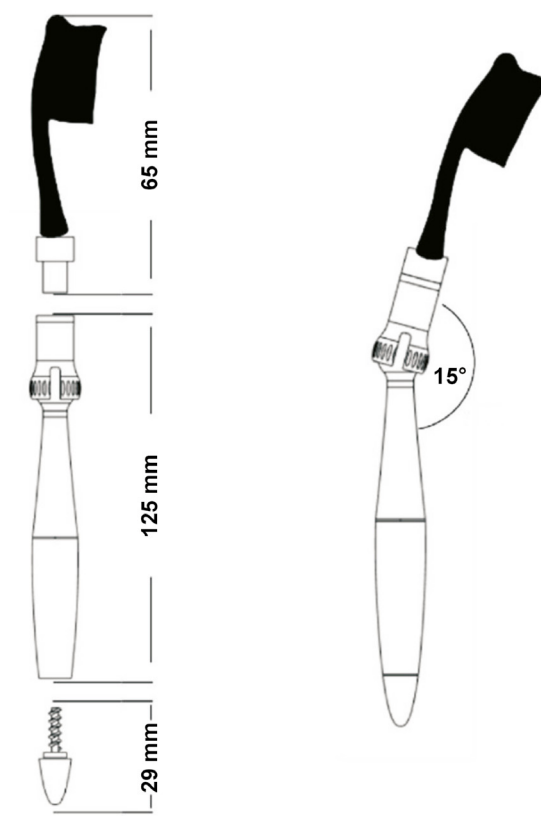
Size of the components of the rotatable shank toothbrush and the bending angle
